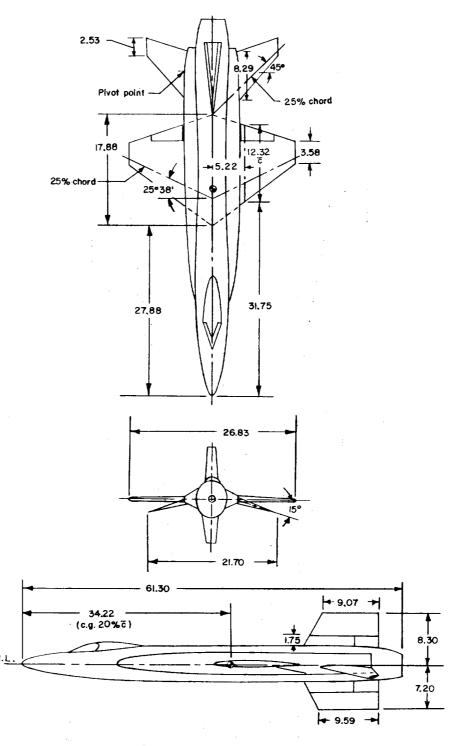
Three-view drawing of the model. (All dimensions are in inches.)
